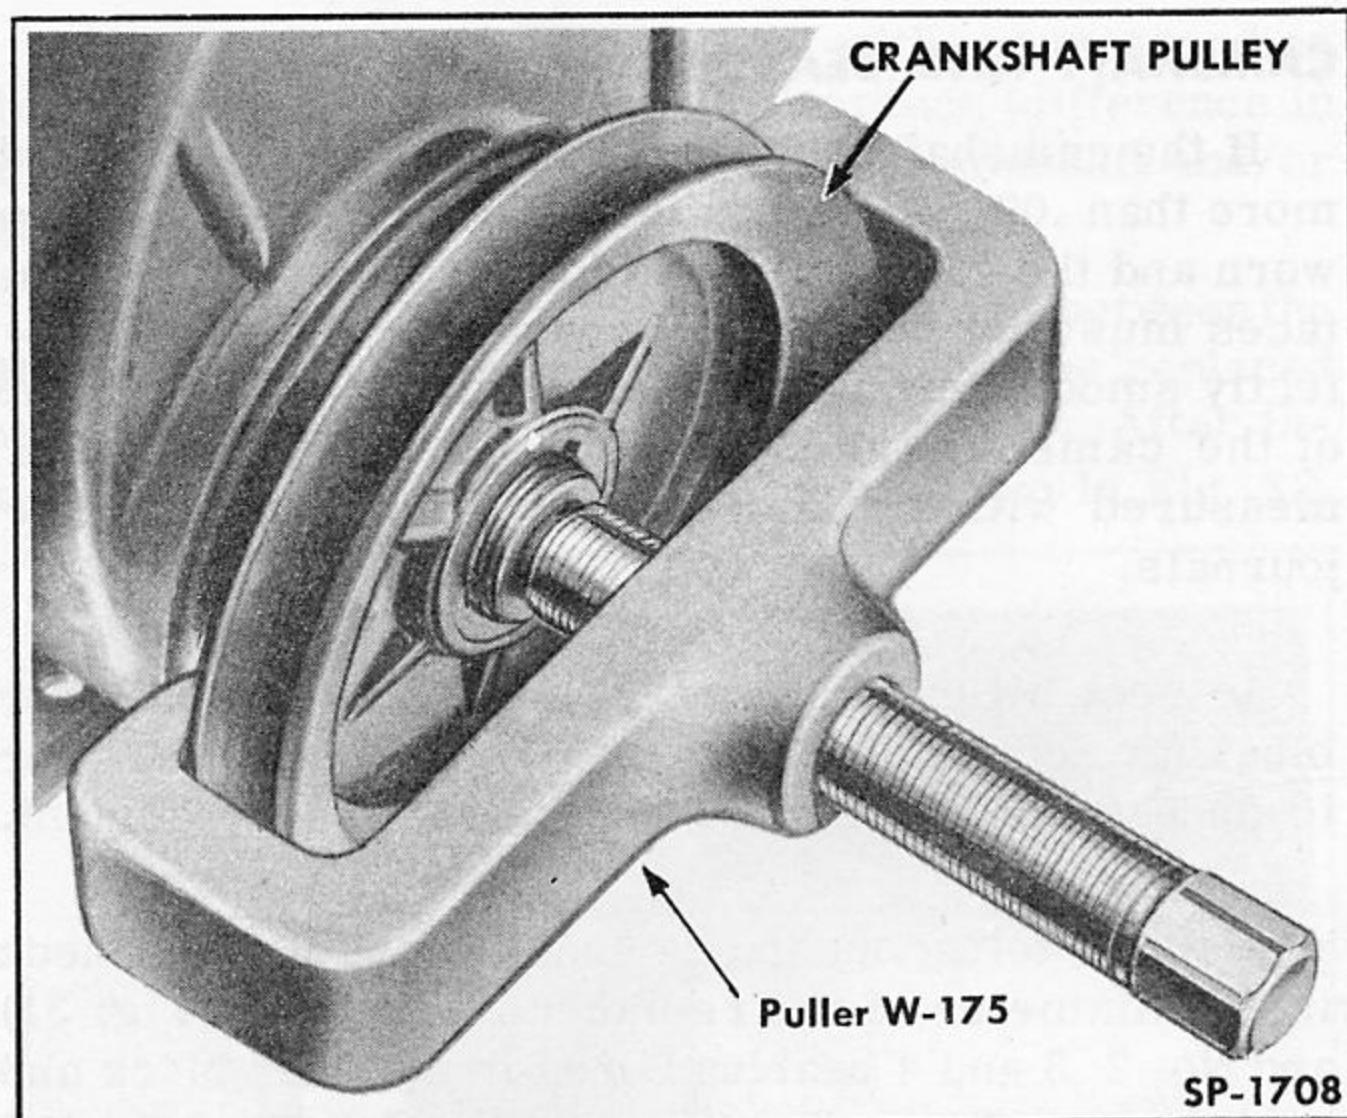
Removing Crankshaft Pulley—4 Cylinder Engine
